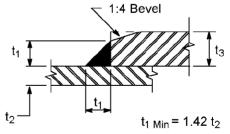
Weld Sleeve Attachments for 16" OD and Smaller Pipe
